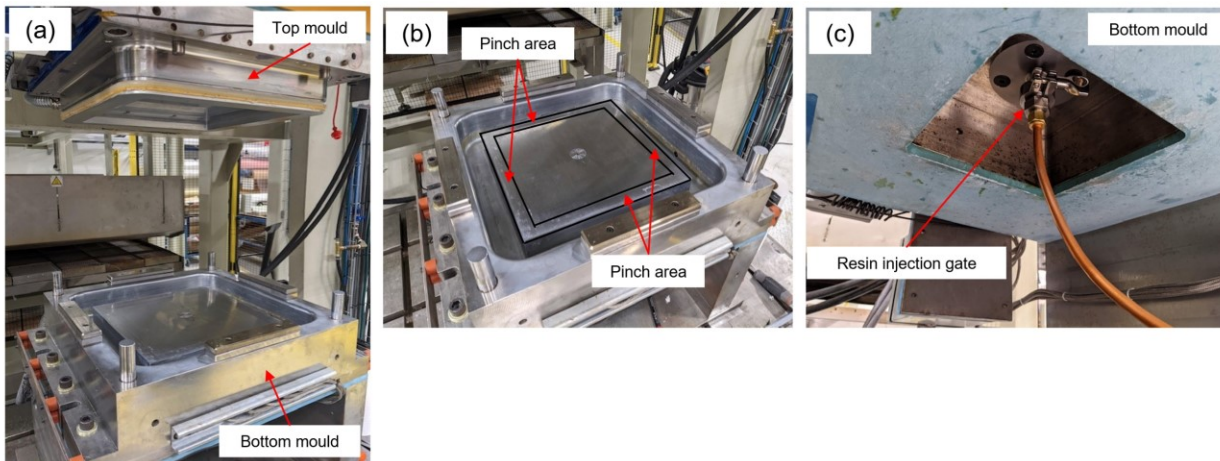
(a) The CRTM mould setup installed in the 1250 ton press, (b) The bottom mould showing slightly elevated perimeter designed for holding the preform in place with a width of 20 mm as highlighted using black line, and (c) bottom gate resin injection setup (Right).
